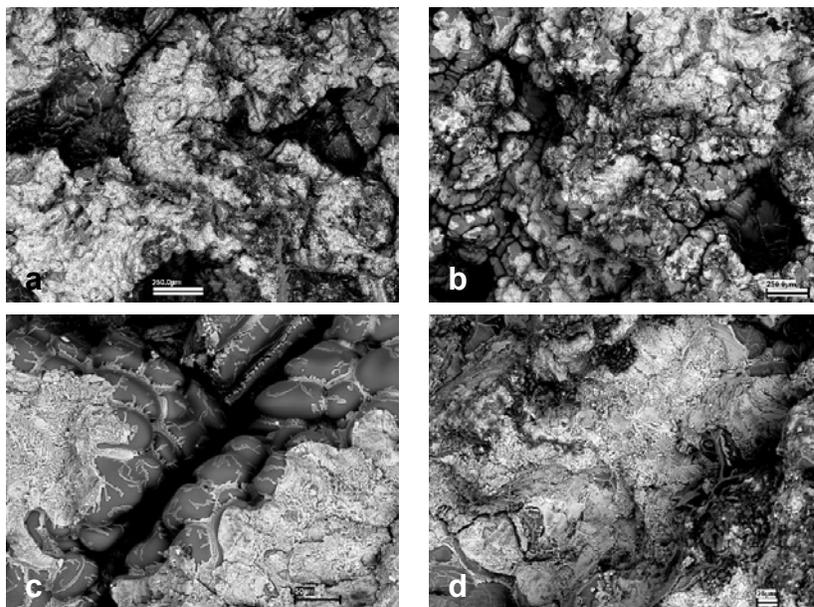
Brittle fracture surface a) mold with copper SEM 400 x b) mold with steel SEM 400x.
